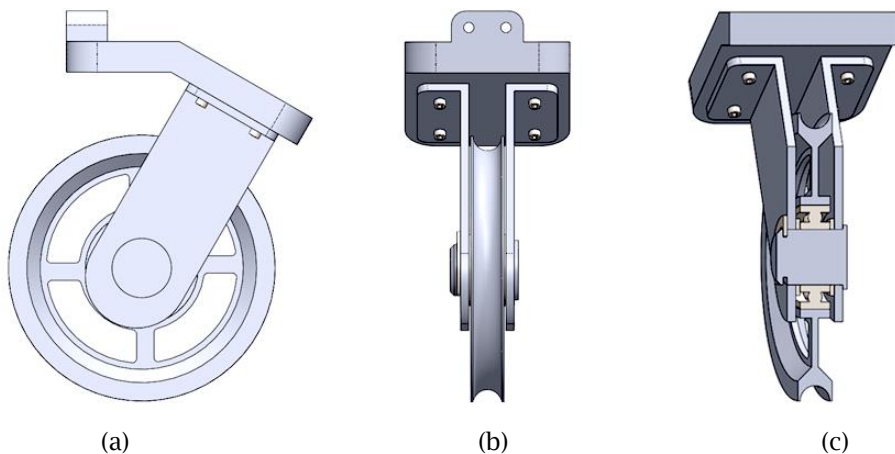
Front (a), side (b), and sectional (c) views of the final assembly used in Experiment 1.
